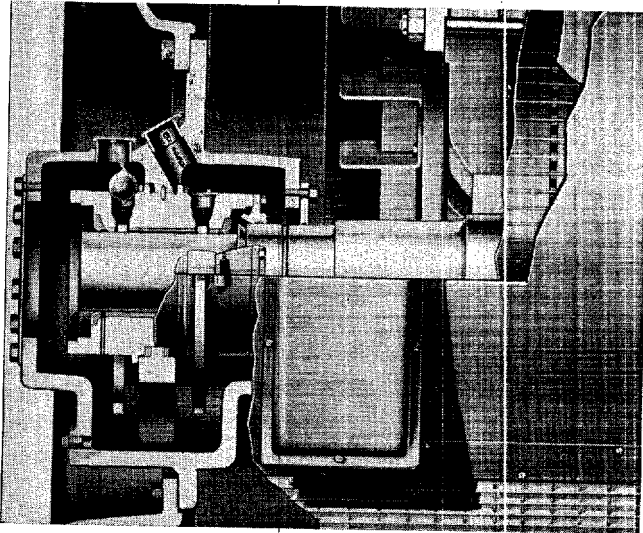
Sectional view through ring-oiled sleeve bearing used on large end-shield bearing motor.
